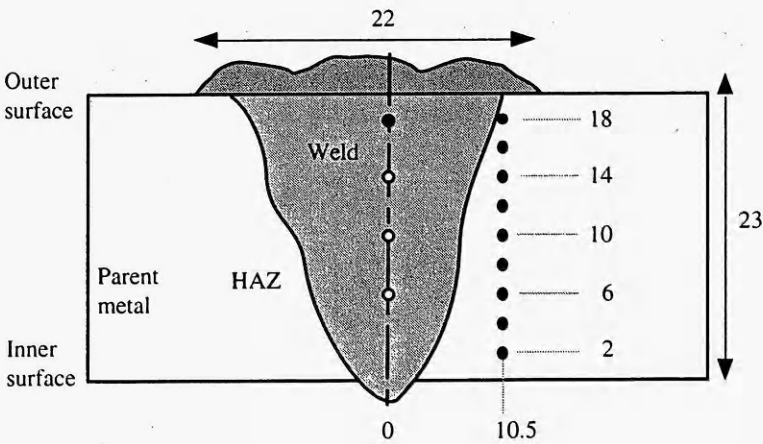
Measurement positions with respect to the weld centre-line and inner surface: all circles for the original weld and only closed circles for the repair weld. All dimensions are in millimetres.
